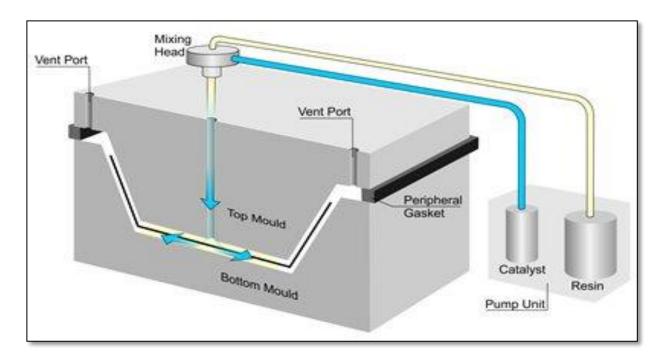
shows how resin injection moulding in composite fabrication is carried out.
